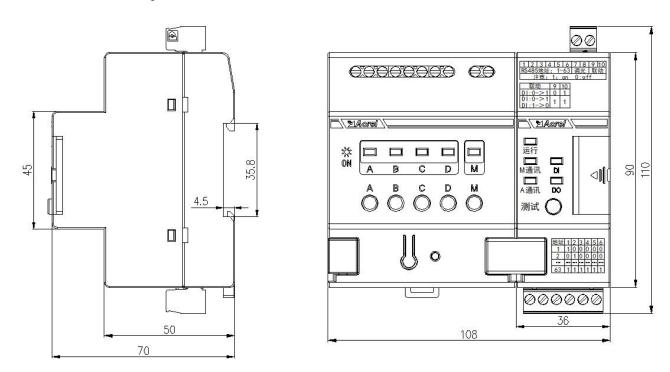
ASL210-Outline and installation dimensions of Sx / 5 low power switch drive
